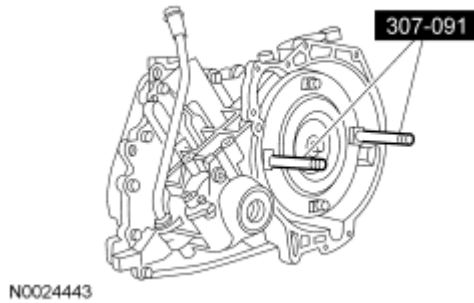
Installing/Removing Torque Converter Using Special Tools
